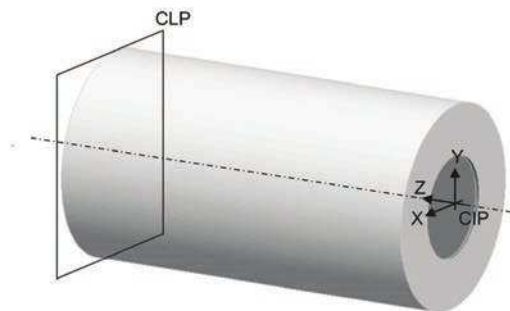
Non-centre cutting end mill: Revolved body of cutting part
